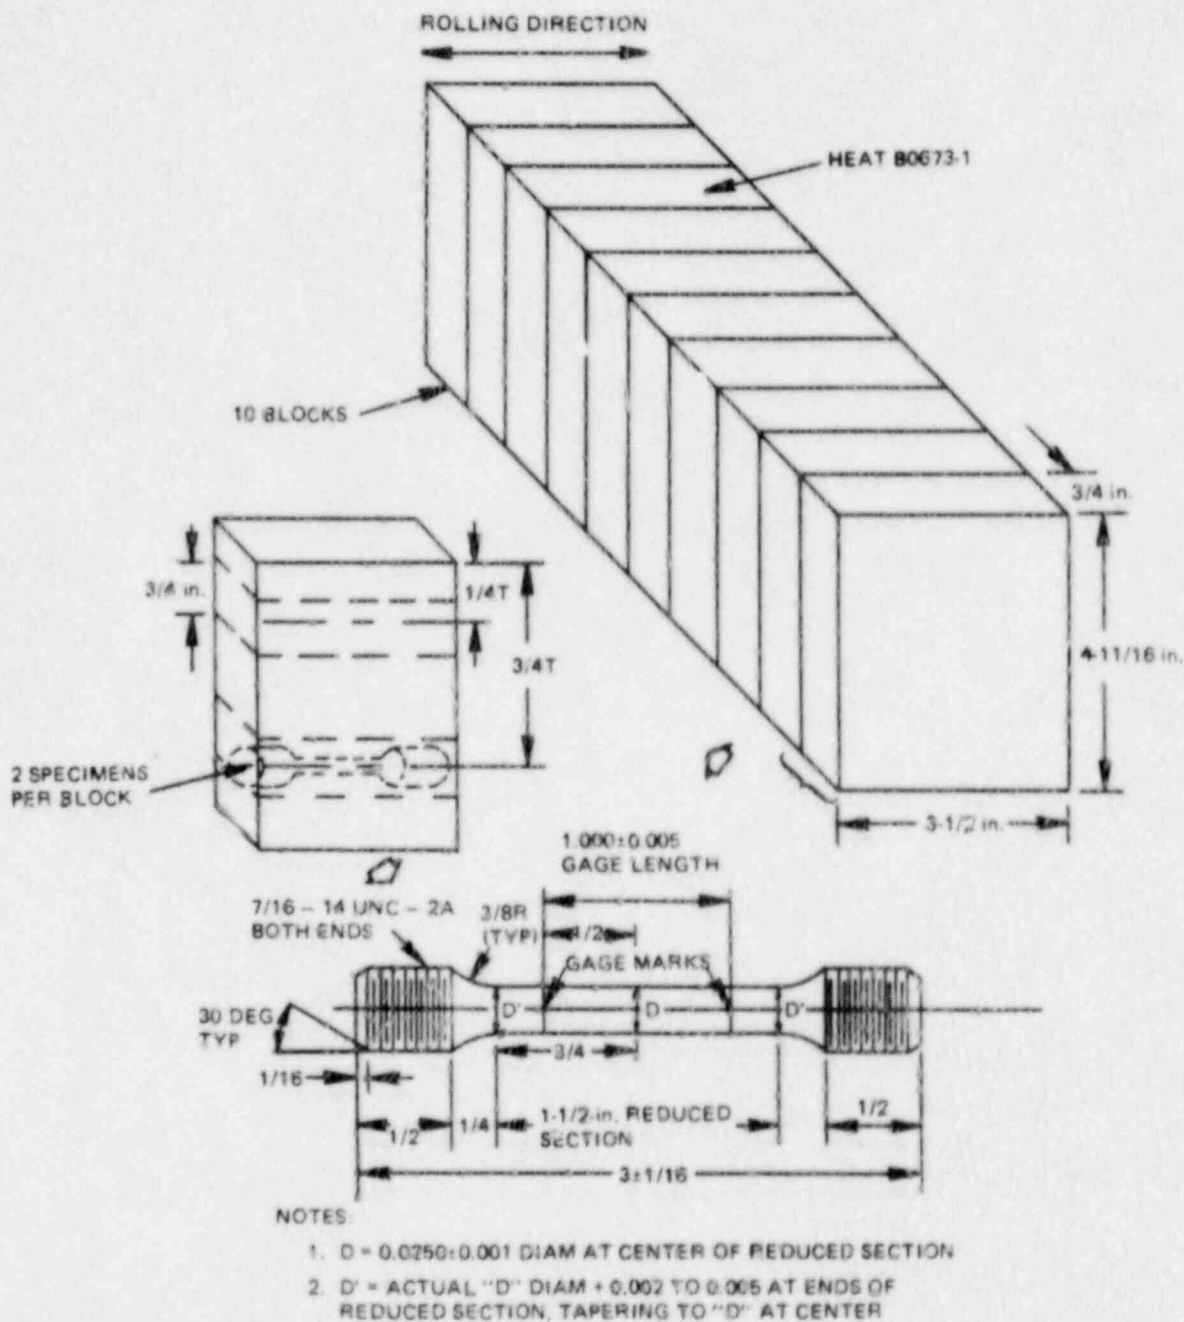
Fabrication Method for Base Metal Tensile Specimens
